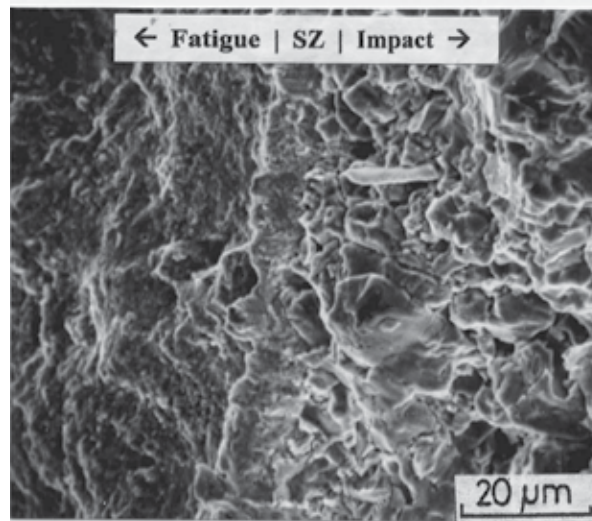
Stretched zone between fatigue and impact fracture surface [2]. Flange yolk forging die
